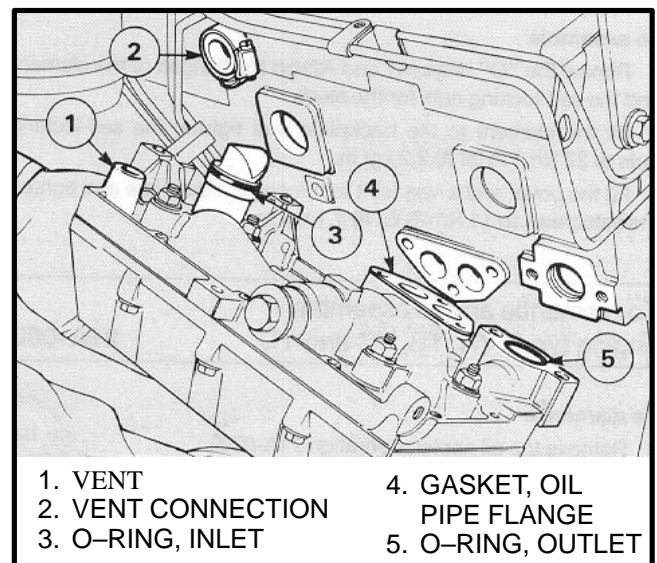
OIL COOLER JOINTS, ENGINE AB
